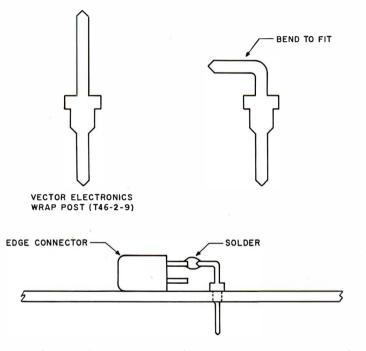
A detailed view of the edge-connector fabrication using wire-wrap posts. Alternatively, the wiring could be brought up through the S-100 plug-board holes. See the text for details.
